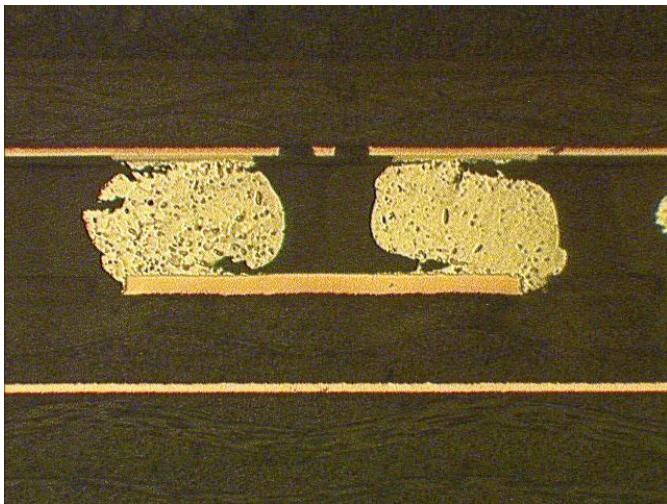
CSP-100 Solder Joints, Board 49, Component U60, SAC305/SAC105, Failed @ 3908 Cycles
